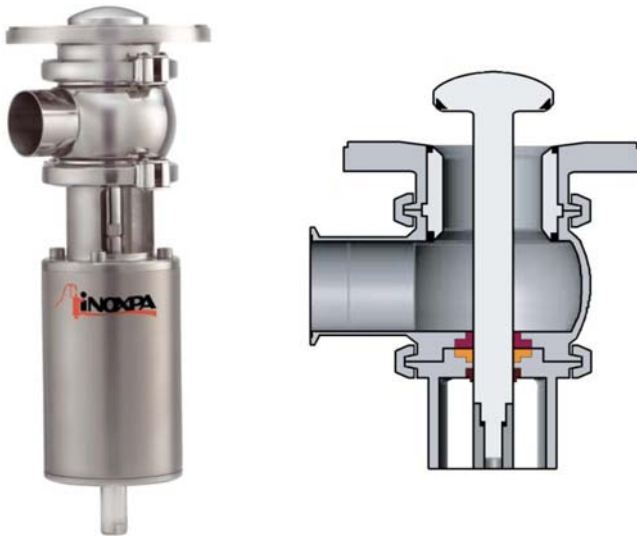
Rising stem tank outlet valve: the valve disk opens into the tank. This design avoids accidental openings in case of excessive pressure in the tank. *Courtesy of INOXPA S.A.
